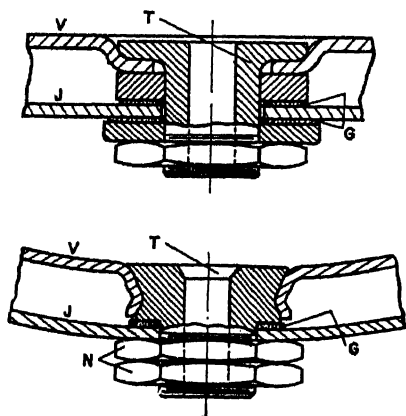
Removable Drainage Connections for Jacketed Vessel.
